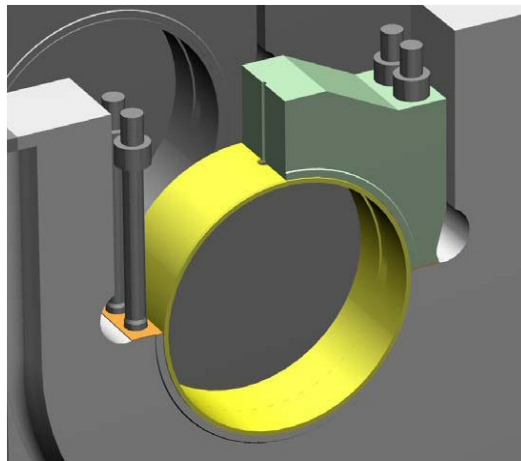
Laser-textured bearing shim (MAN Diesel & Turbo)
